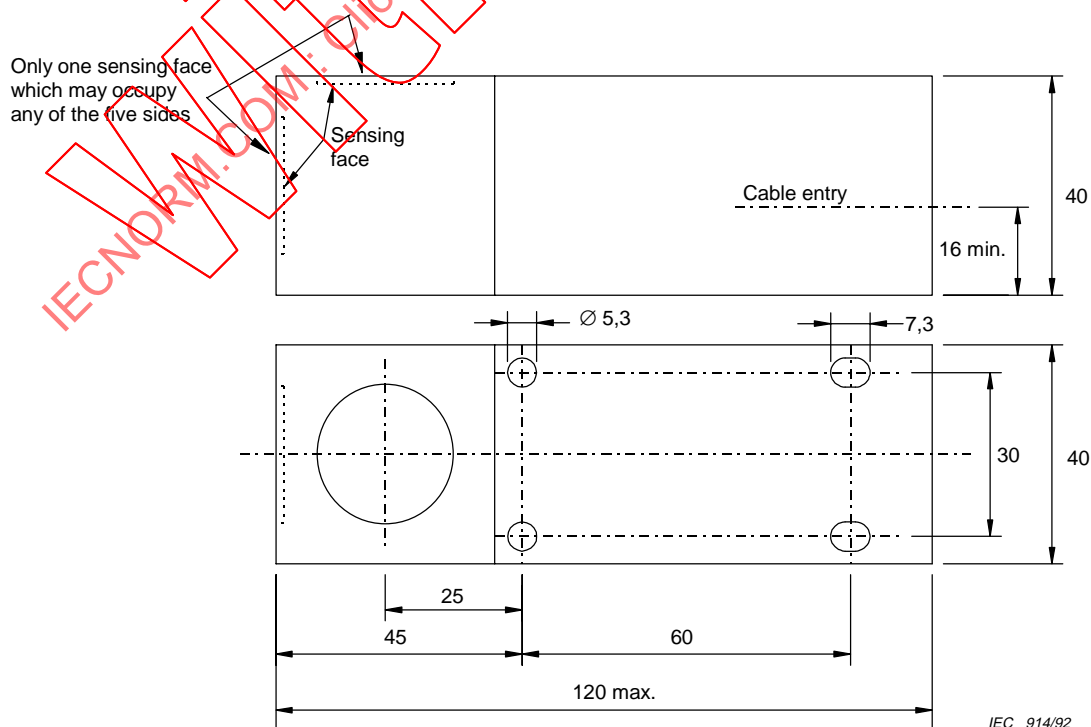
(CC) b – Dimensions, type C40 in millimetres
